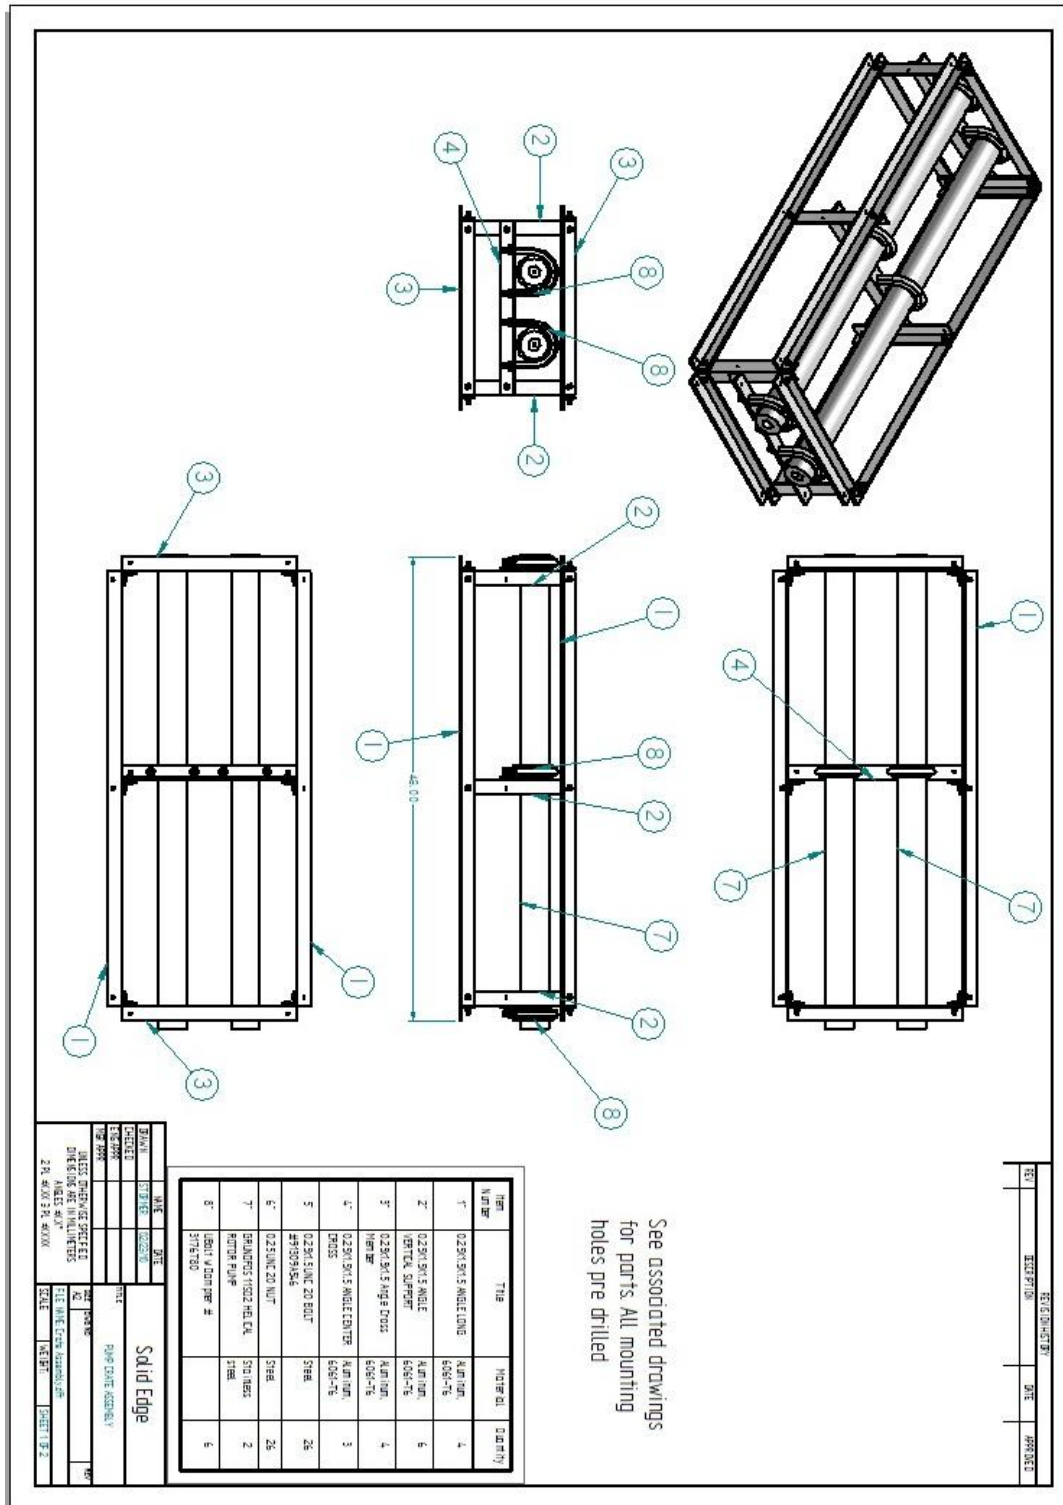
Assembly drawing of pump mounting structure. The final design concepts is still evolving to optimize weight and material costs.
